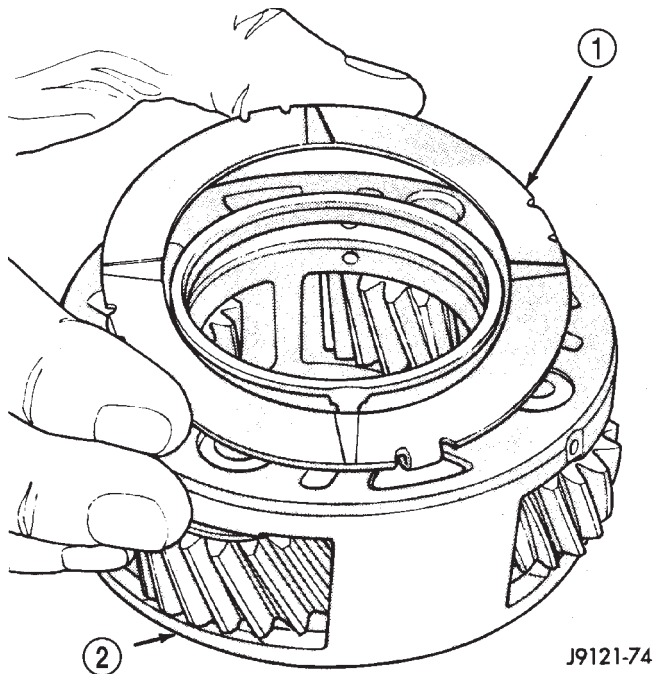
Installing Thrust Washer On Front Planetary Gear
